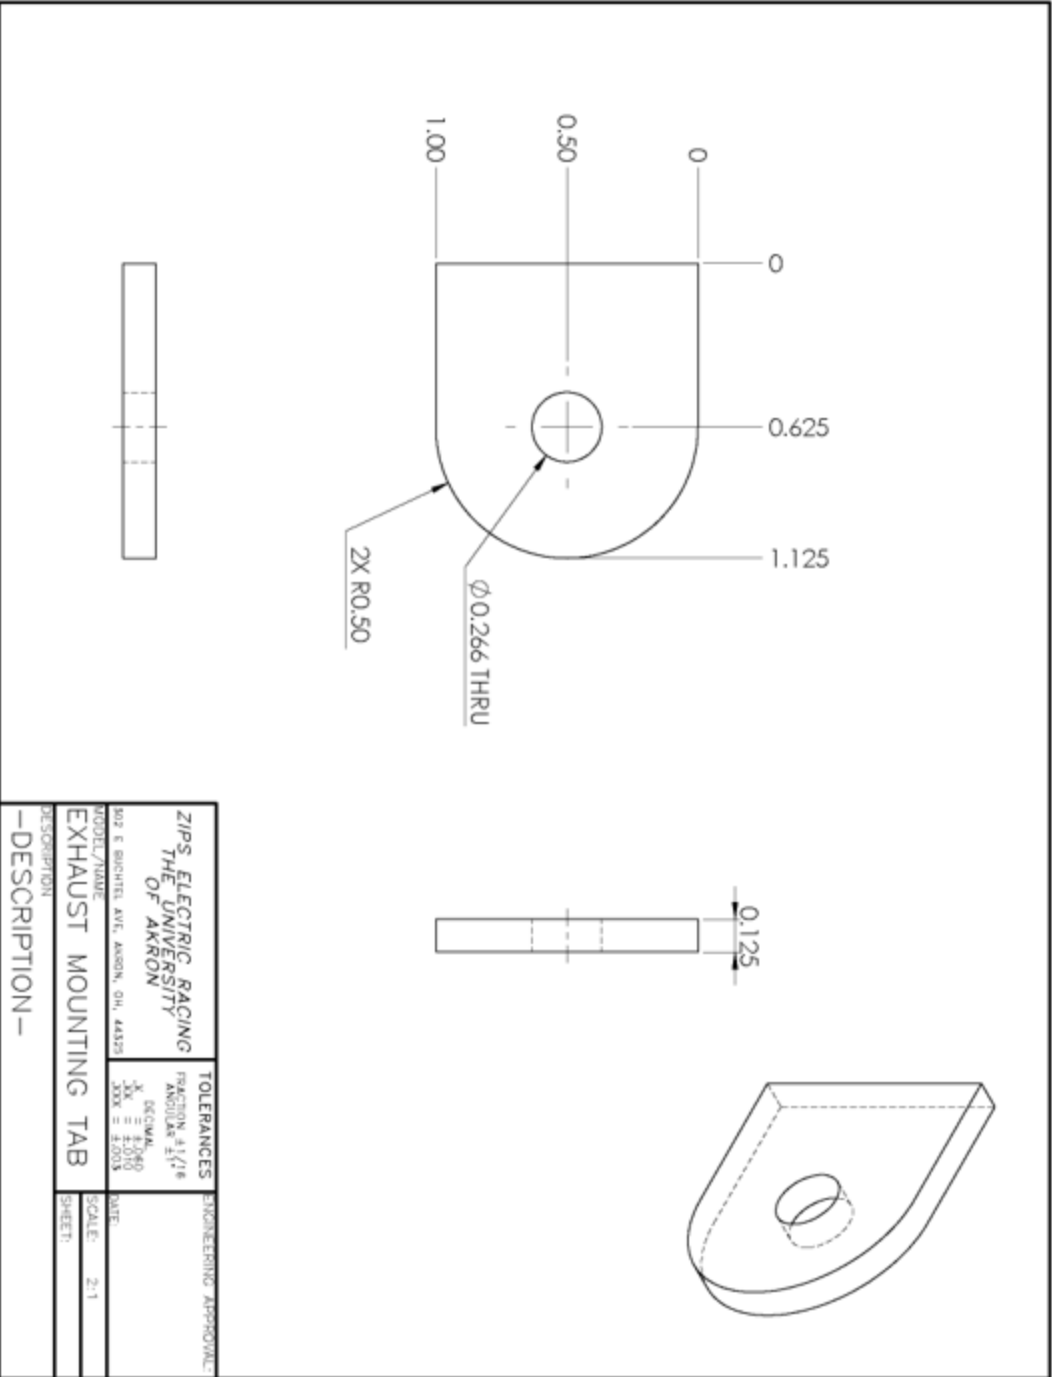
Manufactured Mounting Tab for the Duct
